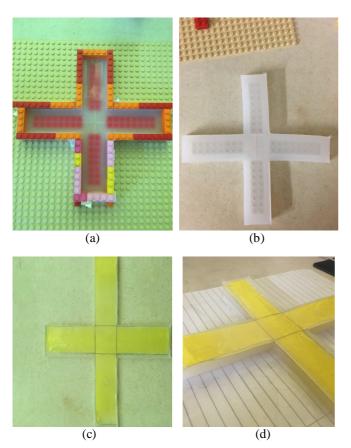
(a) Poured Ecoflex into the Lego mold. (b) Cured layer of four arm gripper. (c) Paper cutting for air ventilation in between two layers (d) First layer and paper attachment embedded together.
